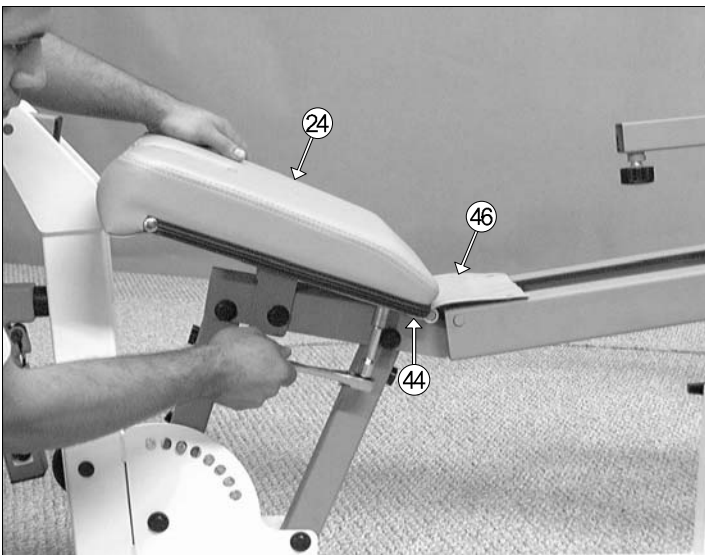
Attach the Seat Pad (#24) to the Cover (#46) and the Metal Hinges (#44) using the previously described Hex Head Cap Screws 3/8-16 X 1 1/4 (#76), and two Flat Washers SAE 3/8" (#84).
